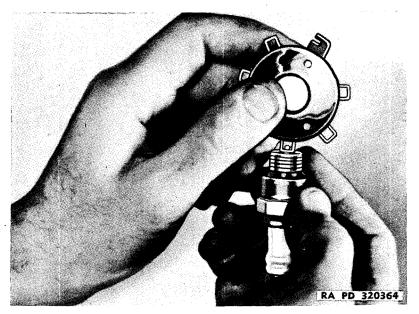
Gaging Spark Plug Gap, using Gage (41-G-350)
